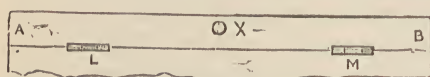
PLAN OF RAIL OF BRACKET SHELF.
